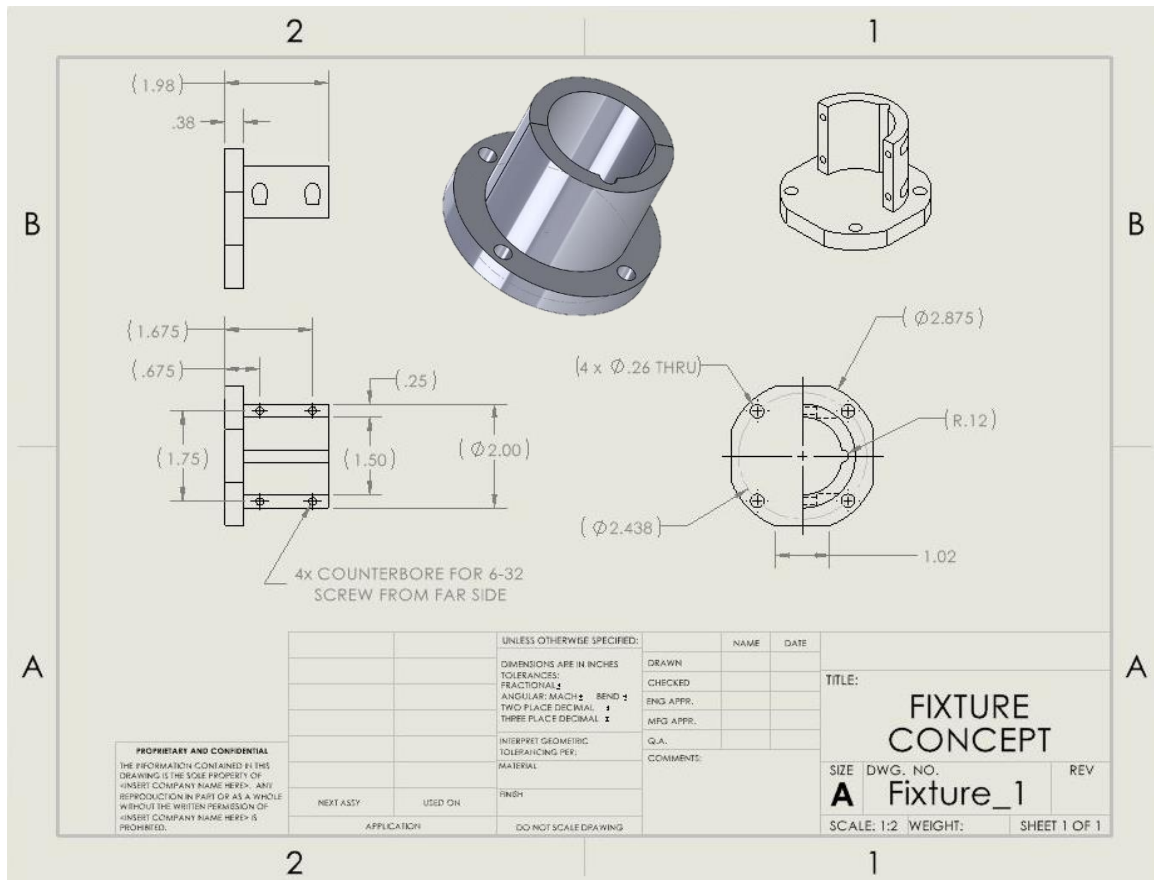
CAD drawing of the base fixture coupled to the base plate of the custom-built loading press
